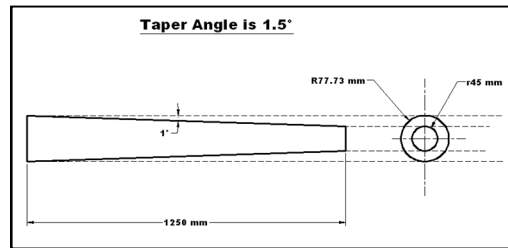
Geometry of a tapered drive shaft having taper angle  $1.5^\circ$ .
